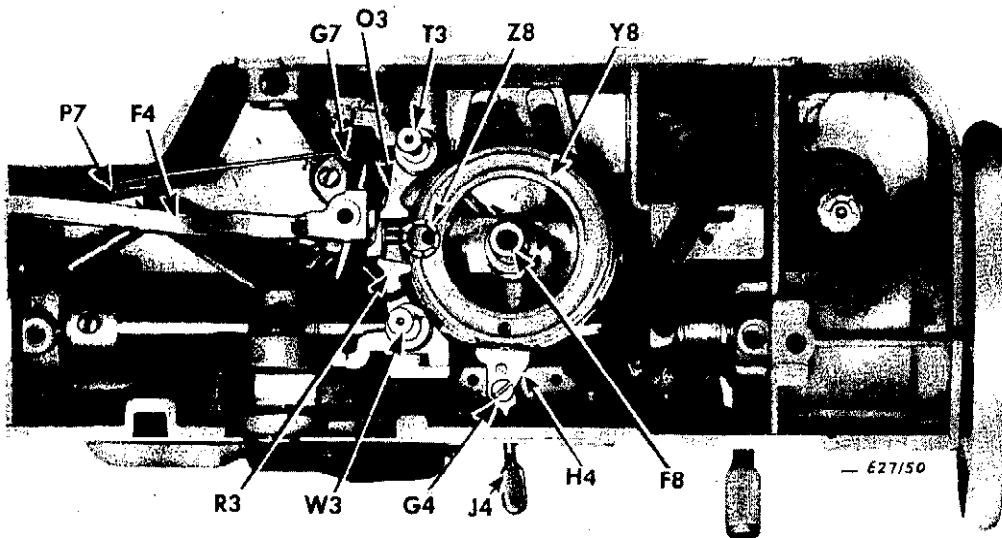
Showing Location of Ball Pivot on Driving Arm
